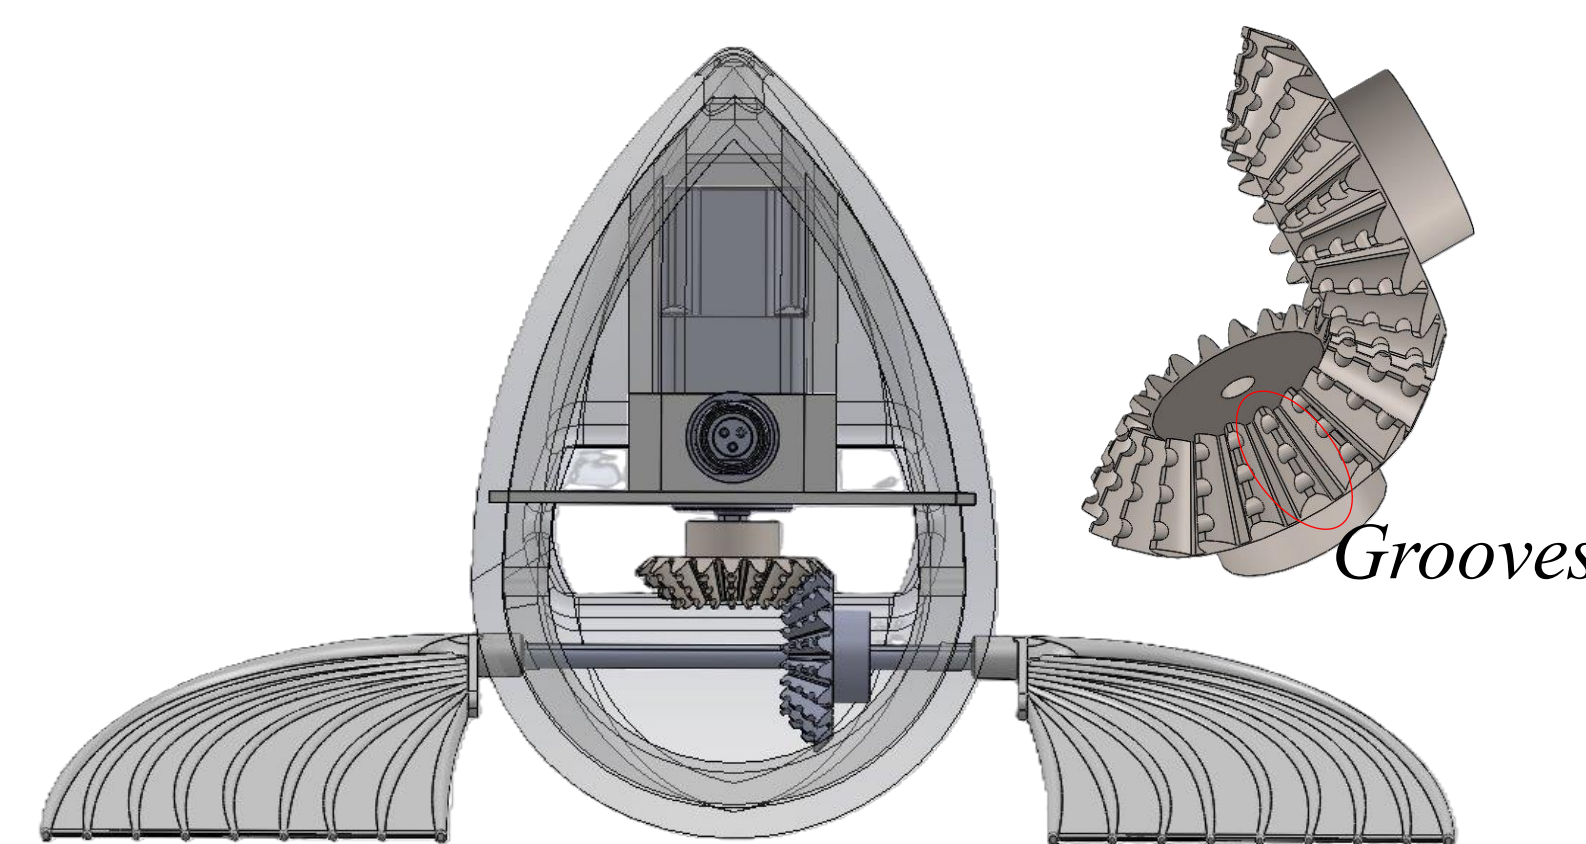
Head Module Design with internal parts (Top Right: Bevel gear system)
